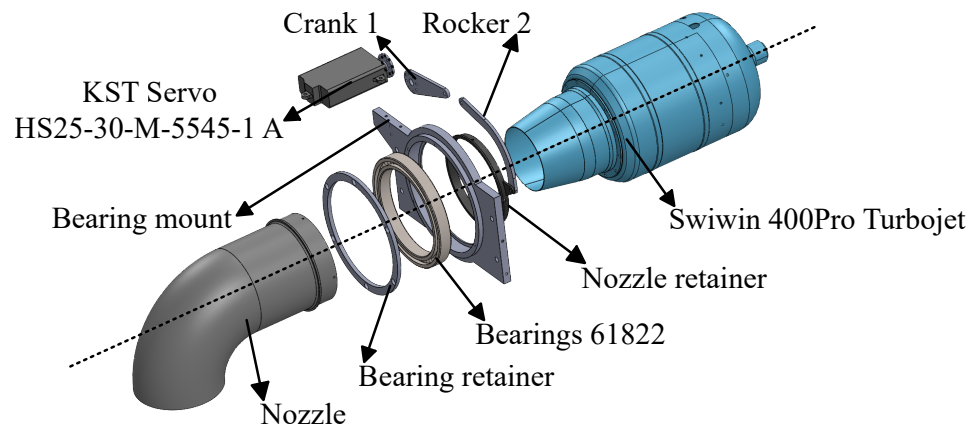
One-dimensional thrust vectoring nozzle explosion diagram.
